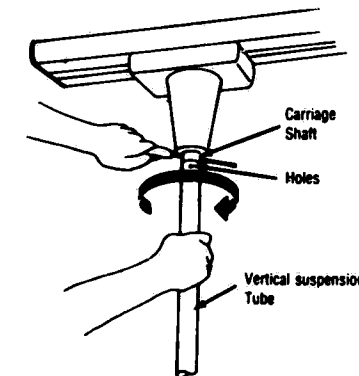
ATTACHING TUBE TO CARRIAGE.
